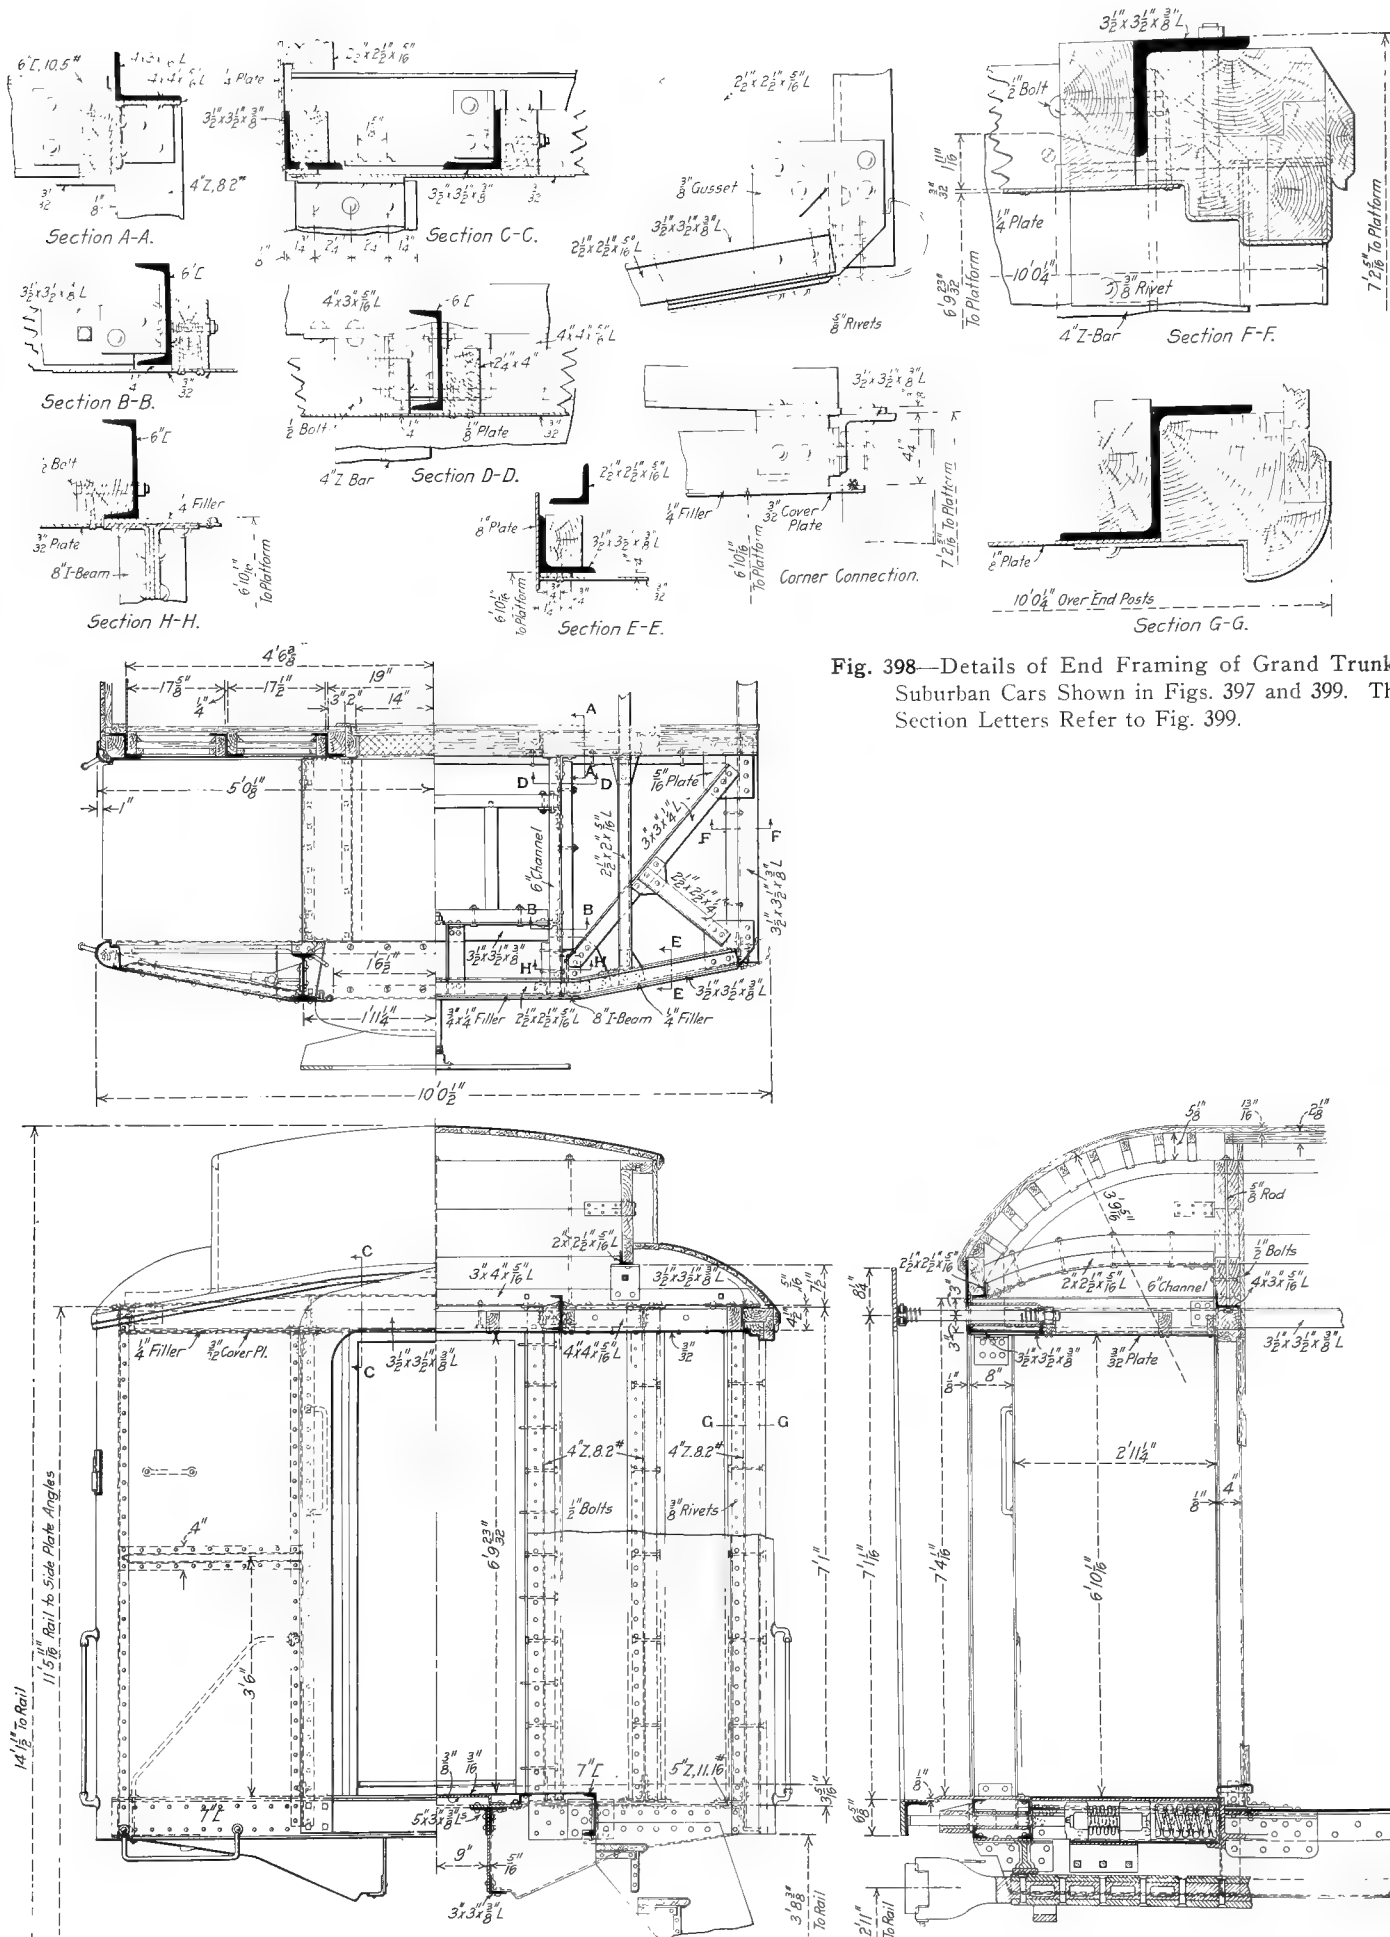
Details of End Framing of Grand Trunk Suburban Cars Shown in Figs. 397 and 399. The Section Letters Refer to Fig. 399.
